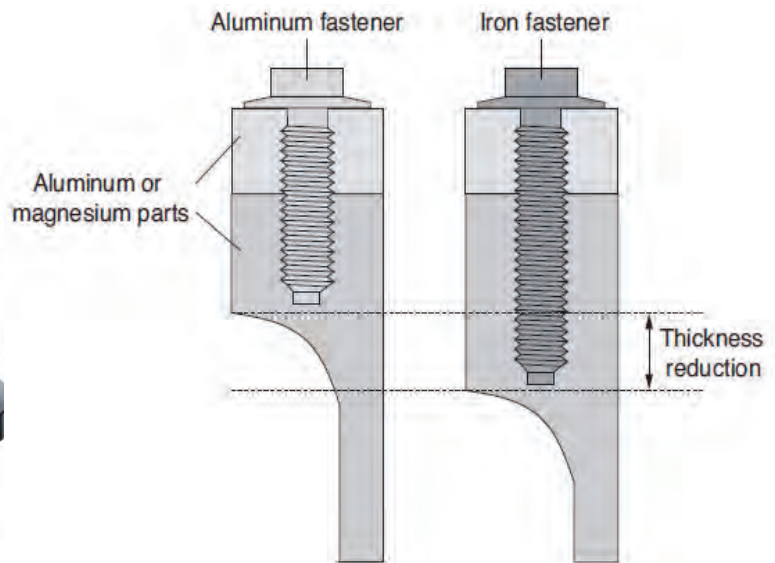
The Difference in Threaded-in Depth Between Using a Carbon Steel Fastener and Using an Aluminum Fastener to Joint with an Aluminum Alloy or Magnesium Alloy Component
